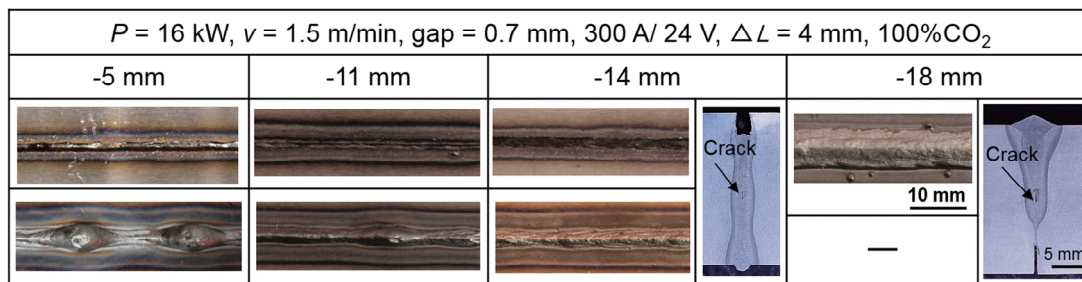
Surface appearances and cross sections of hybrid weld beads produced at various defocused distances.
